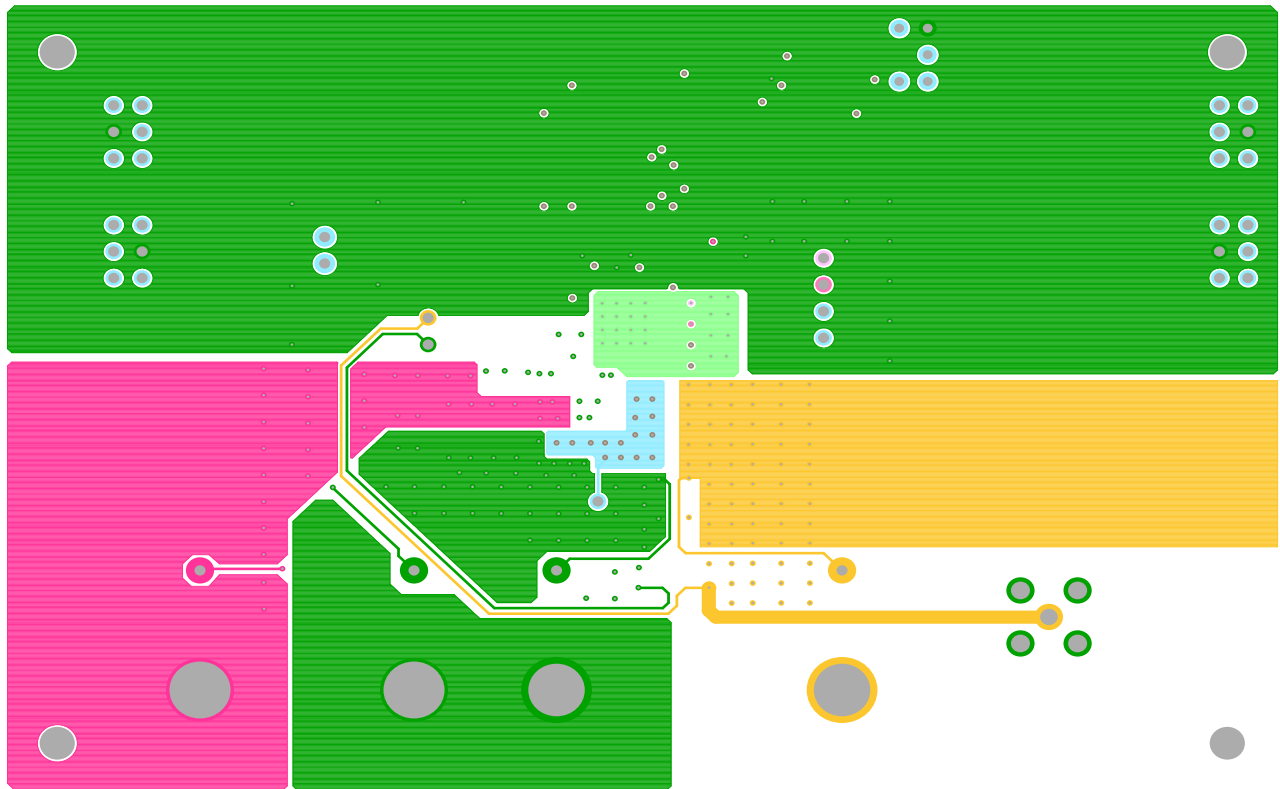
PCB - INNER LAYER - LAYER 3 (TOP VIEW)
